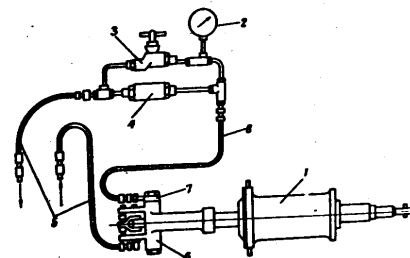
Connection of Testing Apparatus to Hydraulic Booster System
